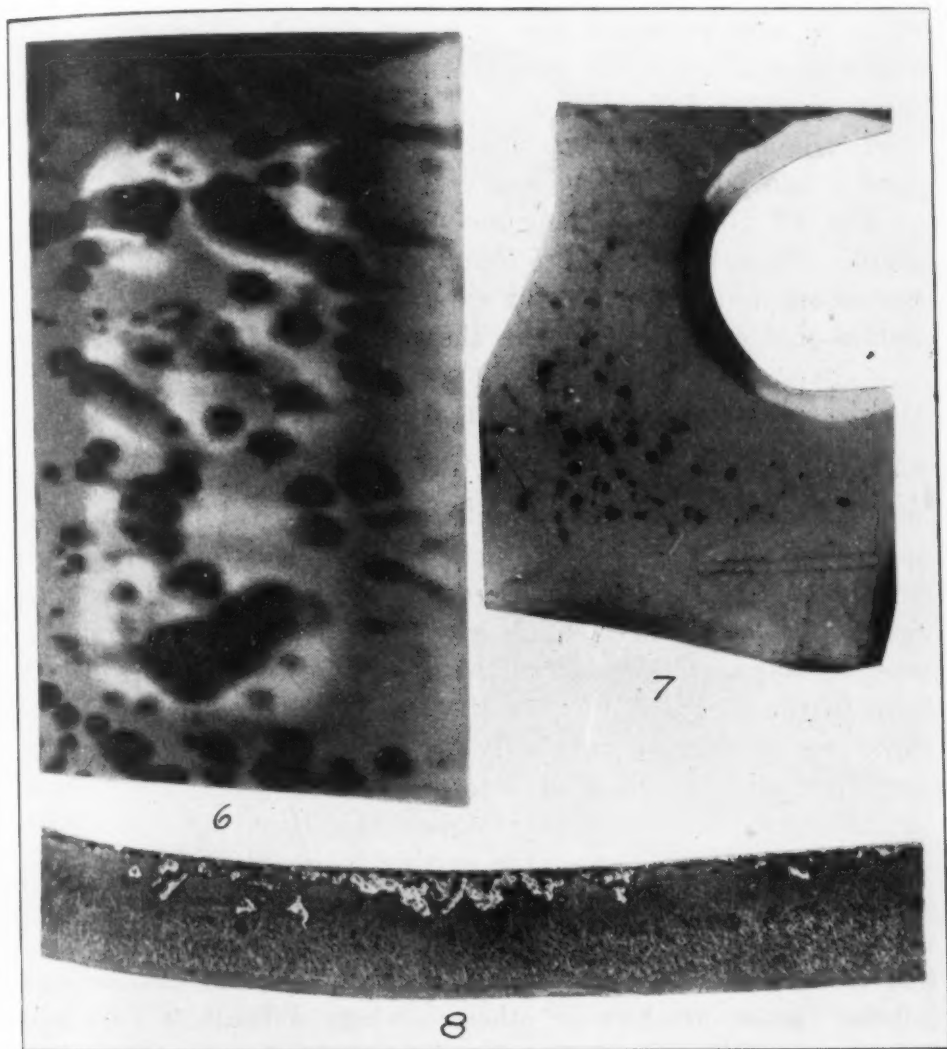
Radiograph of Steel Casting Showing Cavities due to Steam Injected from a Damp Mold. Fig. 7—Radiograph of Steel Casting Showing Cavities Caused by Steam Injected from a Green Sand Mold. Fig. 8—Photograph of Deeply-Etched Section of Steel Casting Showing Sand Pockets along the Surface of Casting. The White Areas are the Sand Inclusions.
